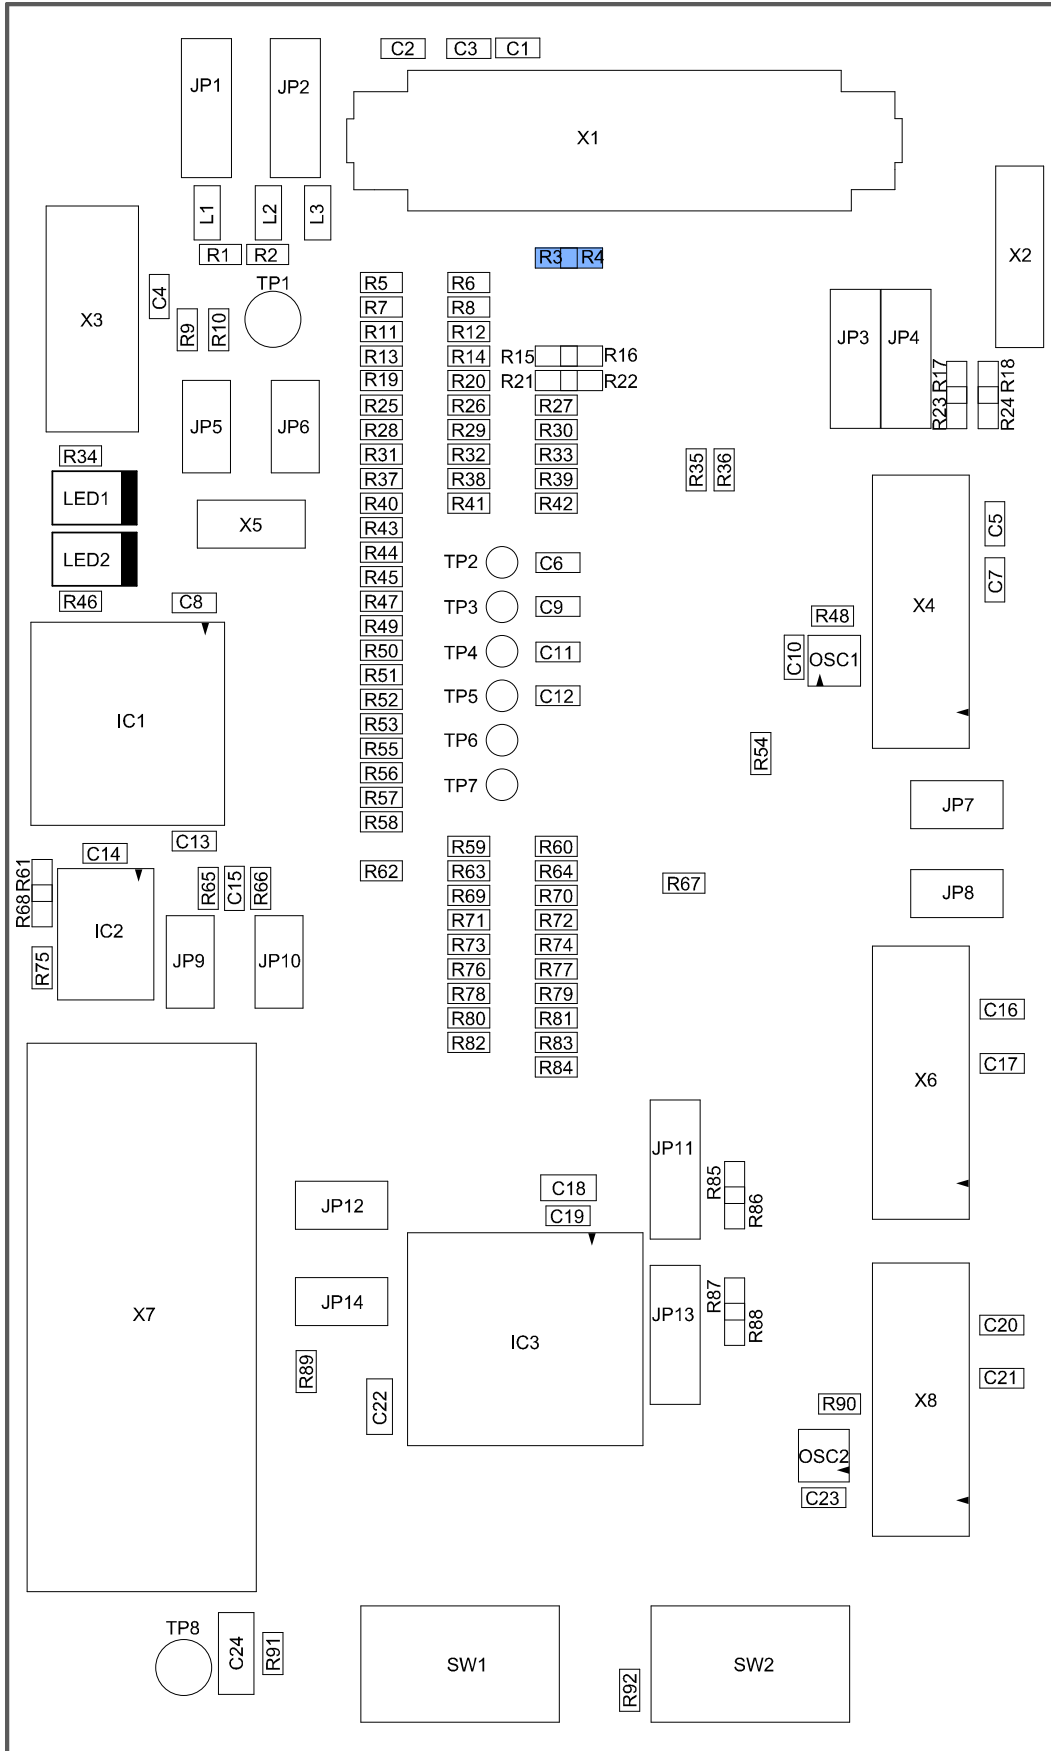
Apalis iMX8 Mezzanine connector X3 assembly options.
